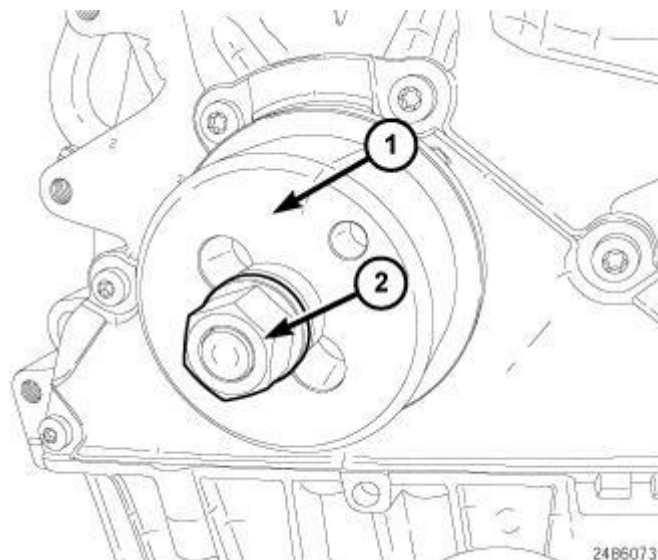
Front Crankshaft Oil Seal & Front Crankshaft Seal Adapter
